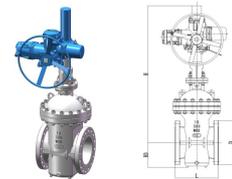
Electric Flat Gate Valve (Side-mounted Handwheel)
